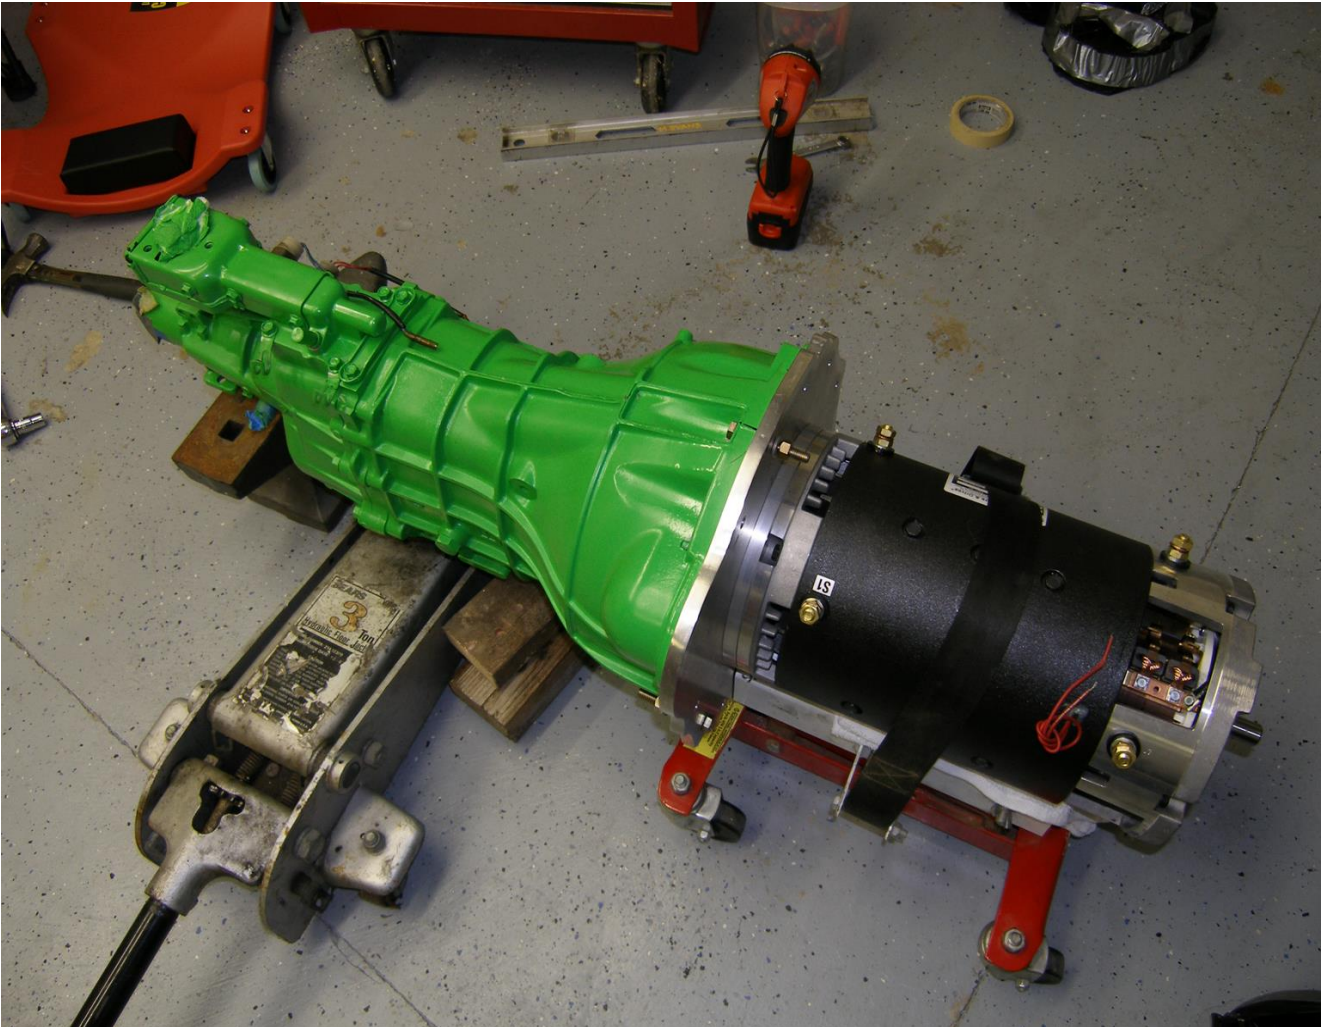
7 With the pickup bolt in place, the entire unit is ready to be lifted into the motor bay
